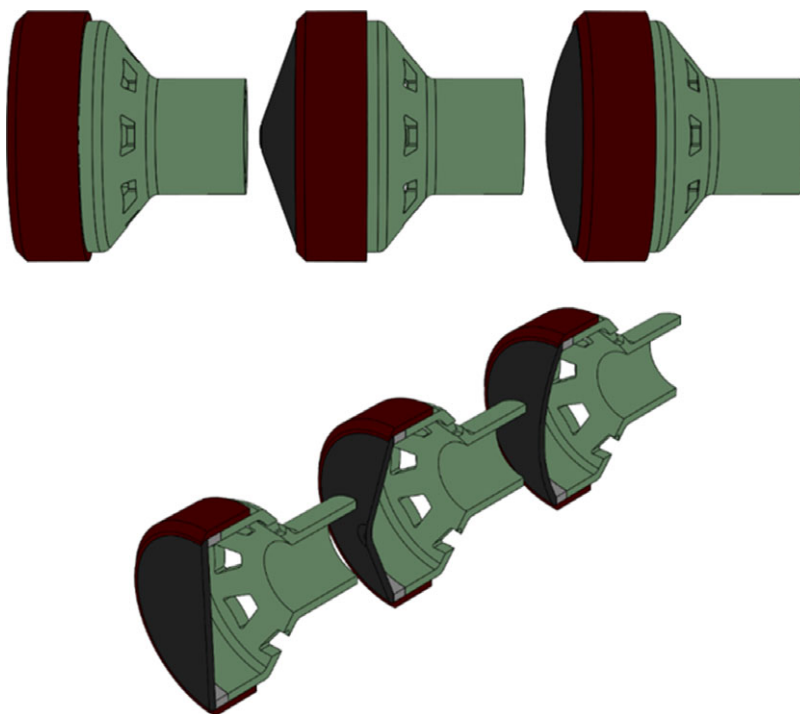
Ablation samples (side view at the top; isometric-sectional view at the bottom).
